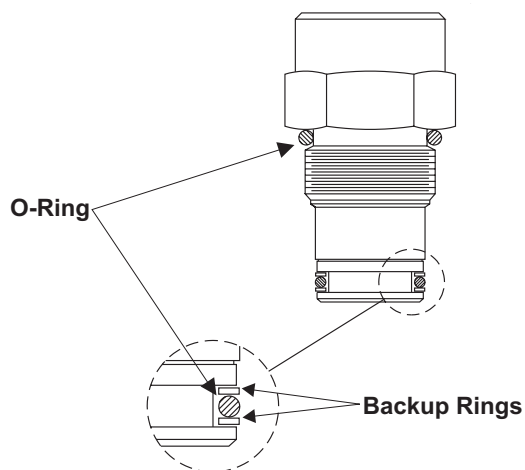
Detail drawing of backup rings and o-ring on solenoid valve cartridge.
